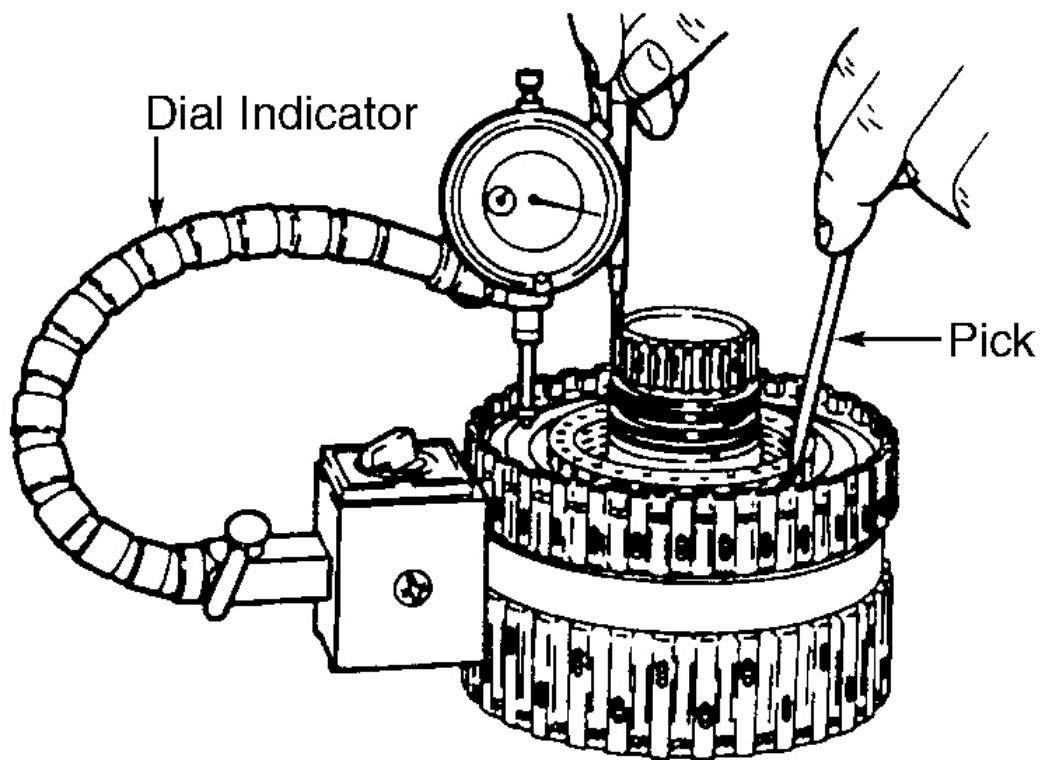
Identifying Forward/Coast/Direct Clutch Assembly With Reverse Clutch Assembly
